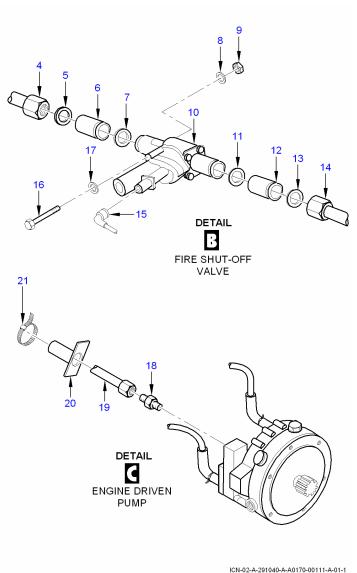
Fire Shut-Off Valves - Removal and Installation (sheet 2/3)
